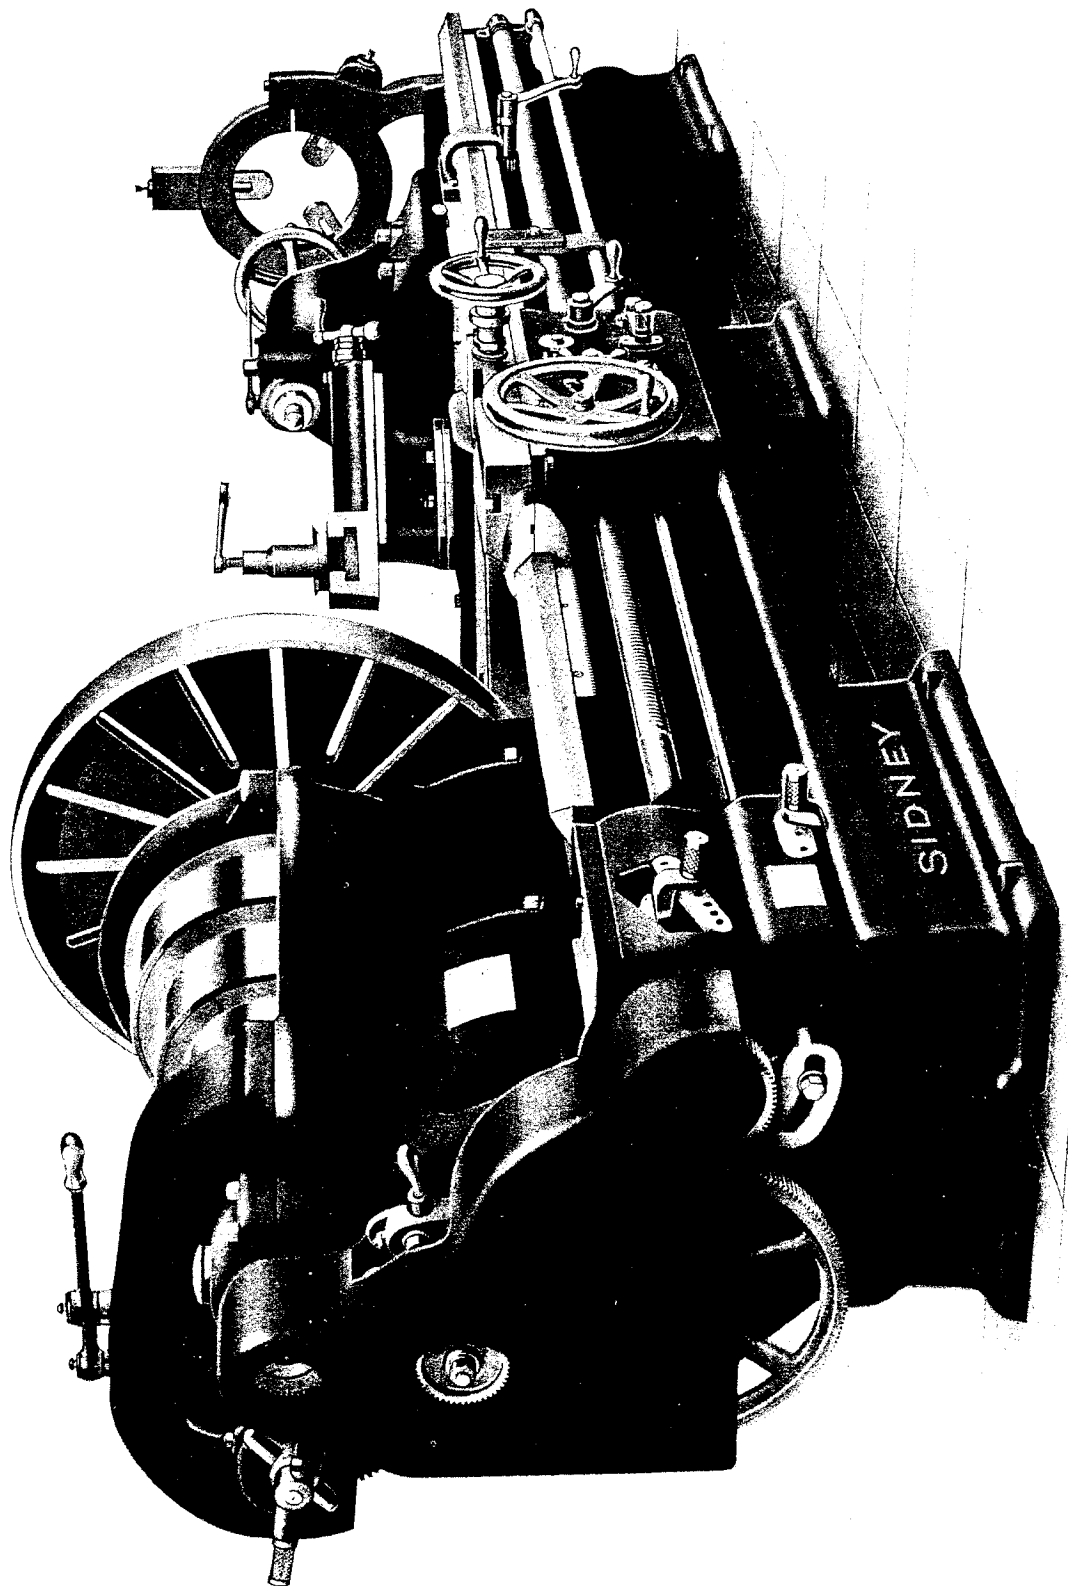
36" x 16' Sidney Heavy Pattern Quick Change Gear Engine Lathe.
